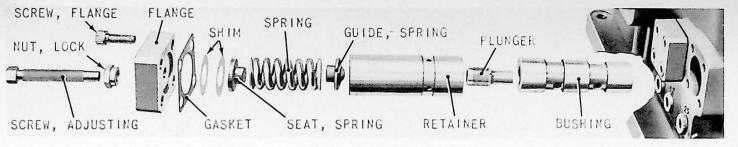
High Pressure Safety Relief Valve, Exploded View (51797).
